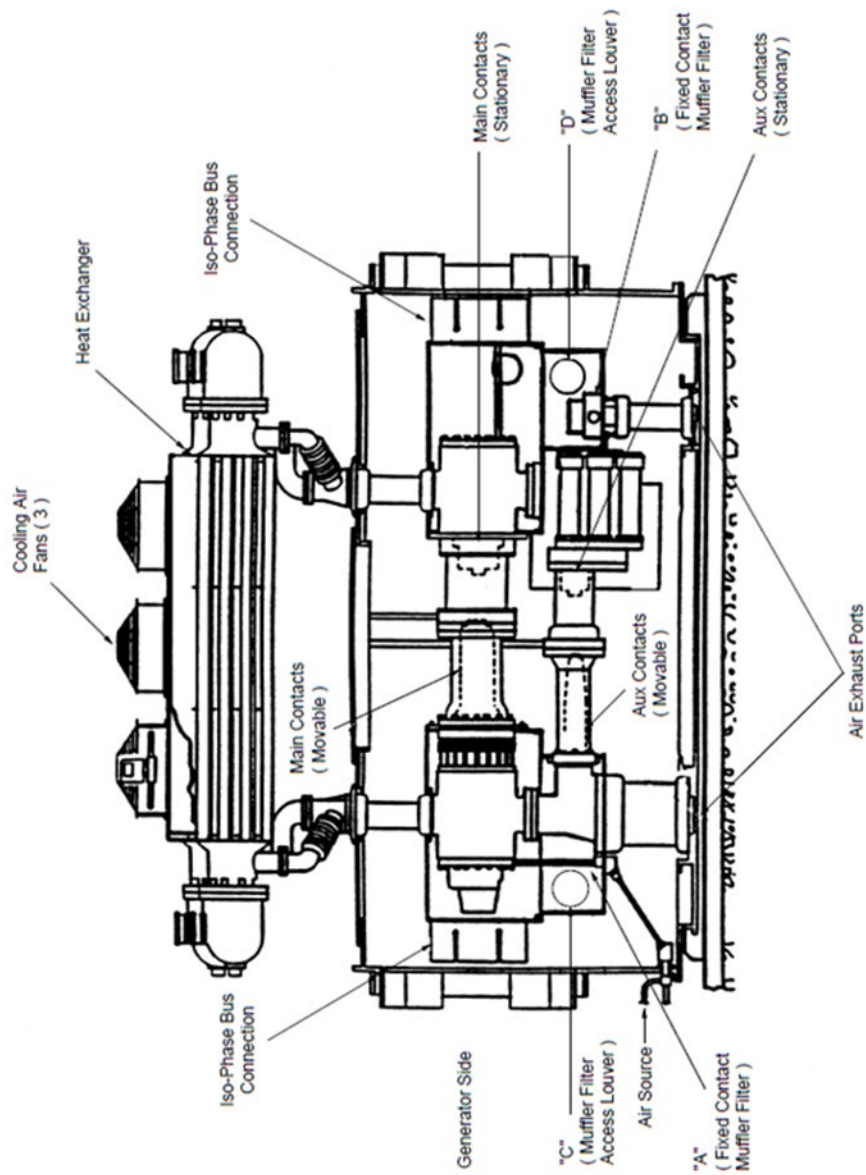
Generator Circuit Breaker General Arrangement Drawing
